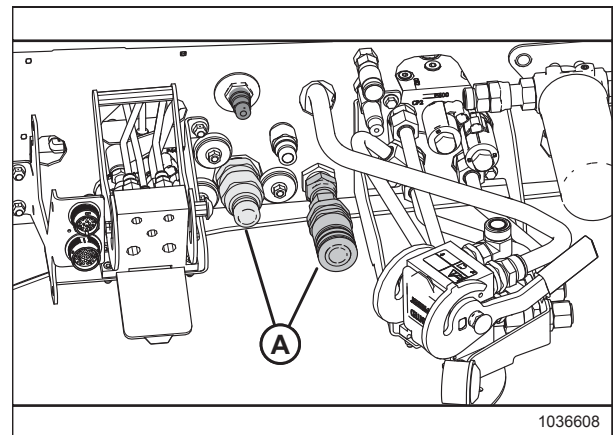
Header Hydraulics Configurations – Auger/Rotary Disc/Draper-Ready
